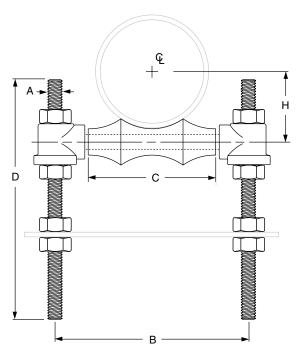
WEIGHT (LBS) • DIMENSIONS (IN)
